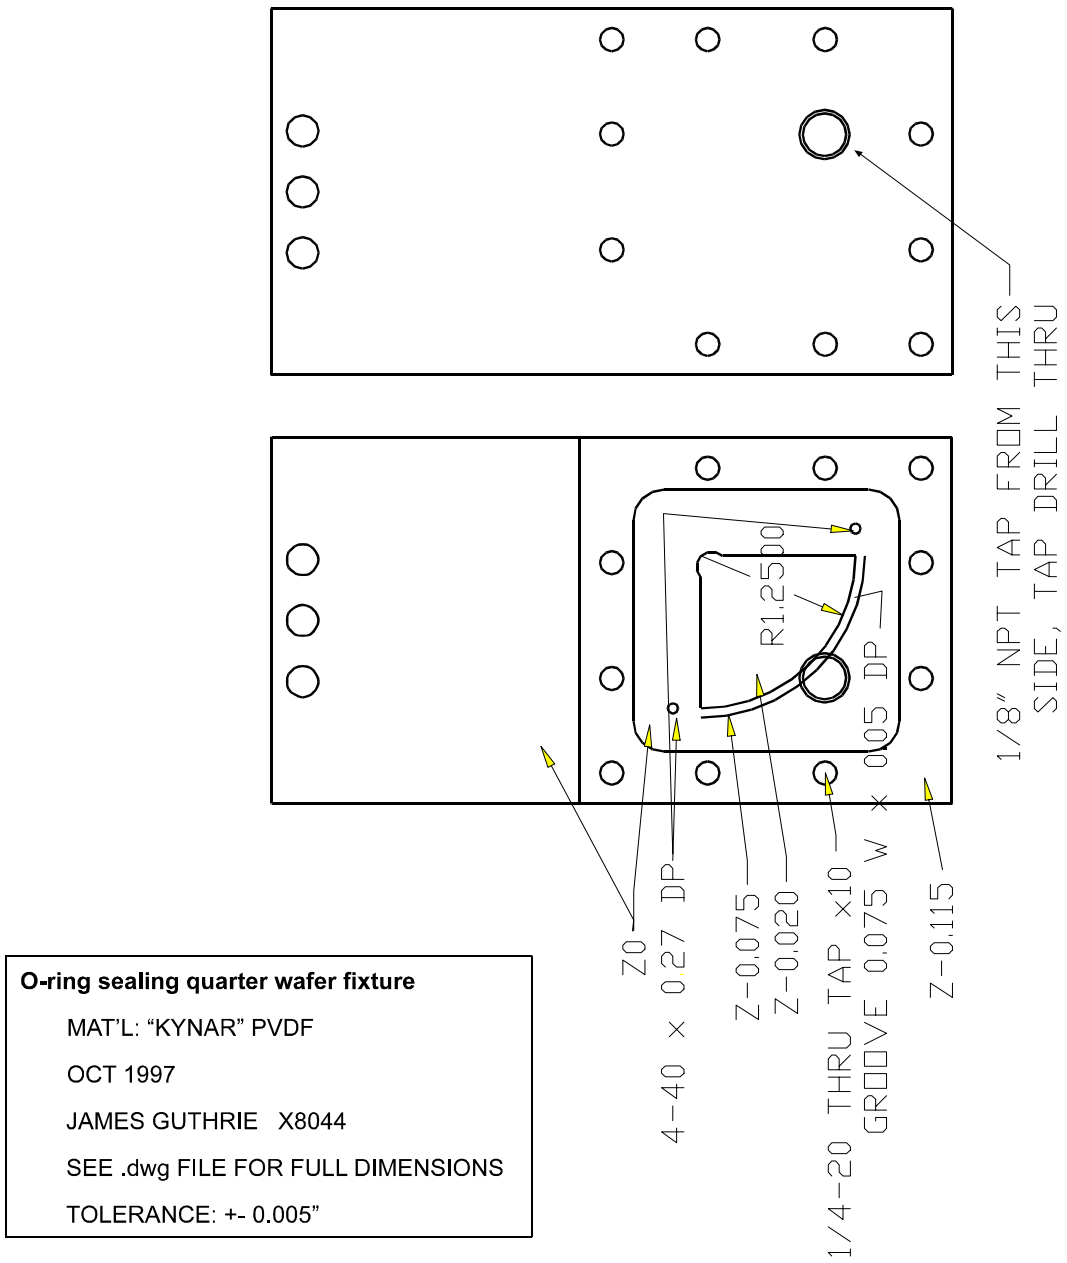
Quarter wafer o-ring sealing plating fixture, mounting block. Wafer is held in place, and electrical contacts are made with two of the smaller Be-Cu spring finger contacts stocked by J. Whaley.
